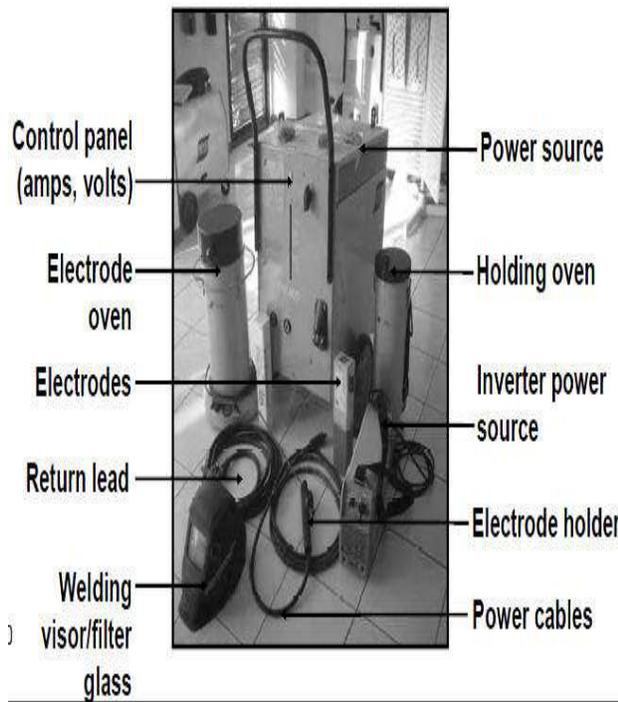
(b). Manual Metal Arc Welding Basic Equipment
